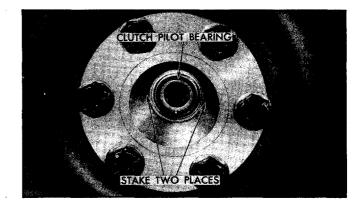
Staking to Retain Clutch Pilot Bearing
